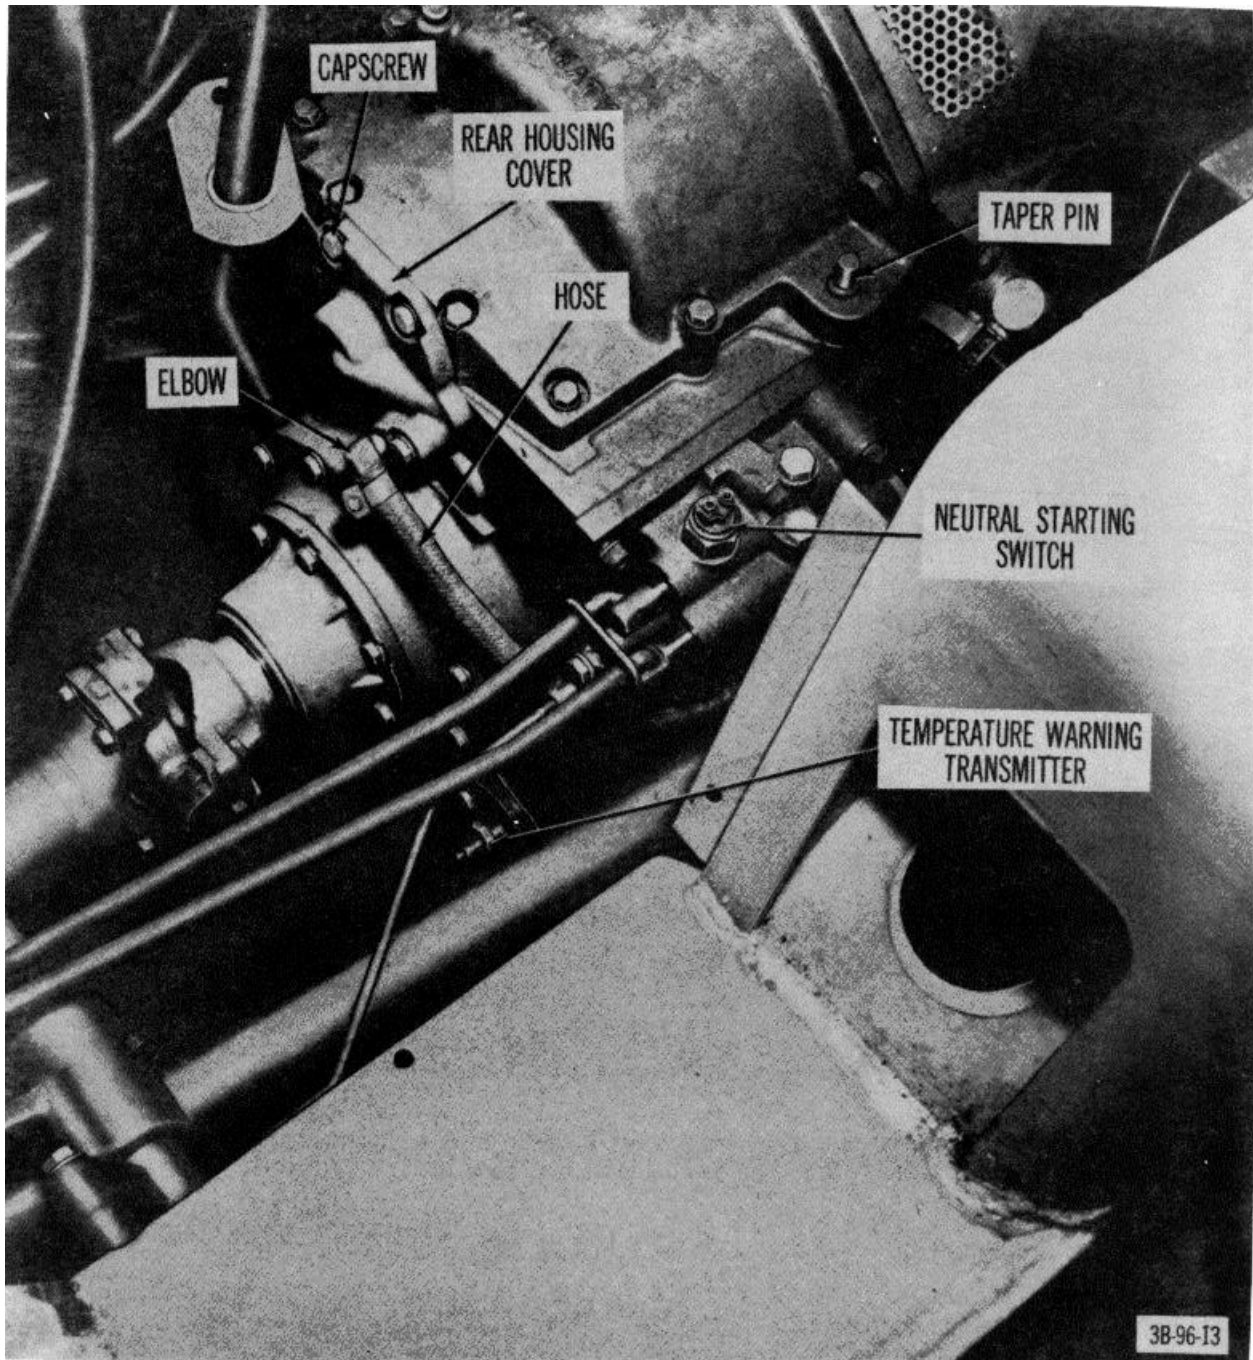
Overhead side view of transmission and linkage, installed on truck.
